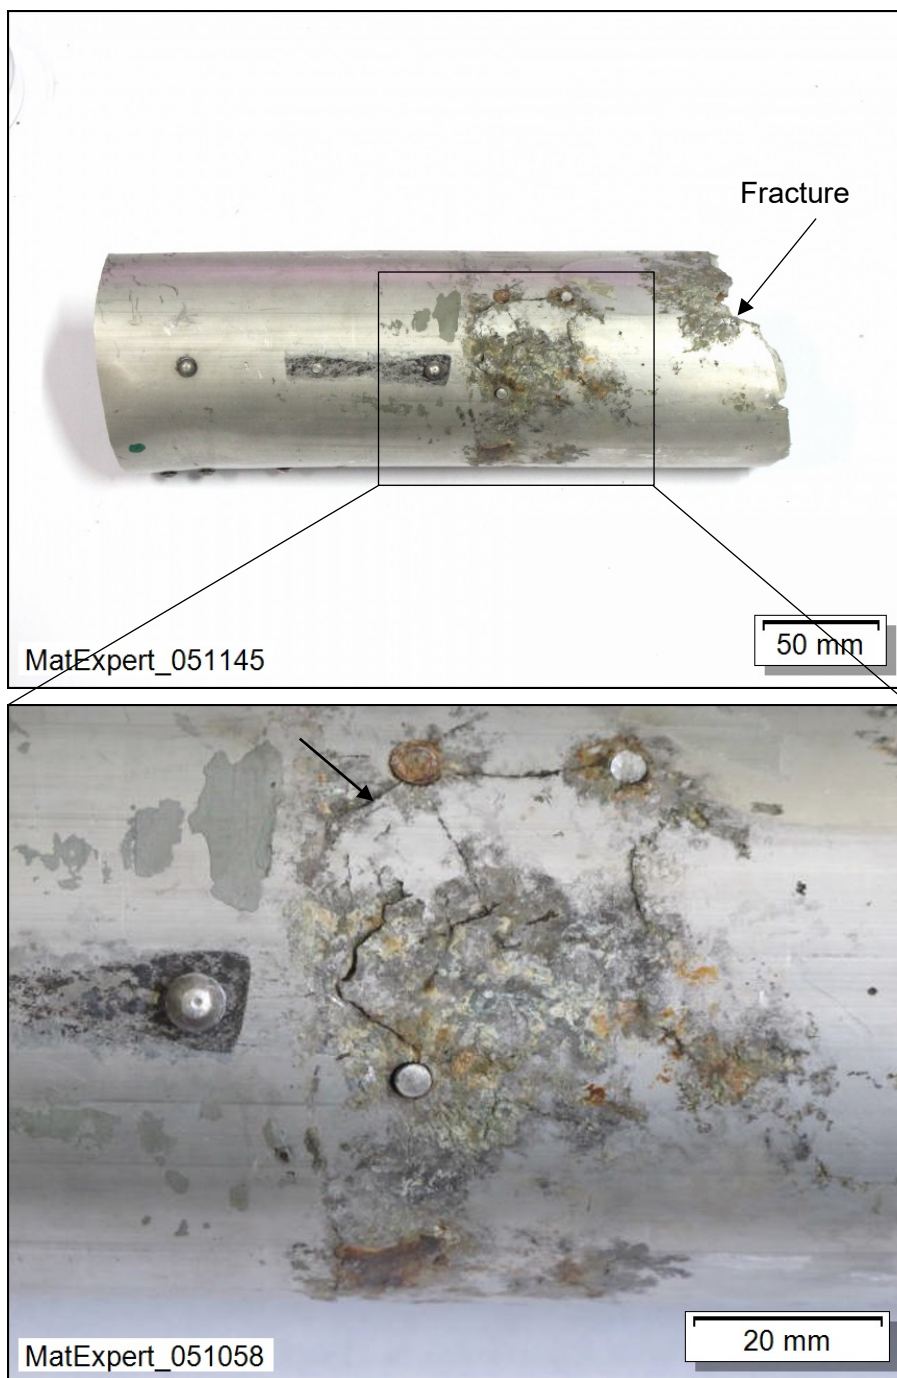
Exposed crack (arrow) under joint 89 on the lower spar section L1.
